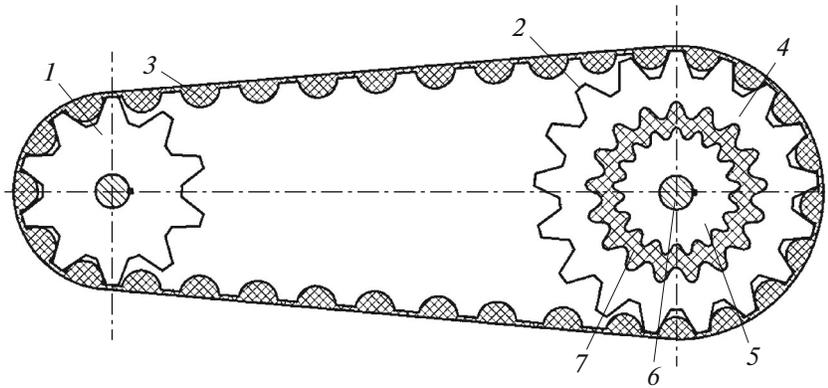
Toothed belt transmission with a composite driven pulley: (1) drive pulley; (2) driven pulley; (3) toothed belt; (4) external gear rim; (5) pulley hub; (6) shaft; (7) rubber bush.
